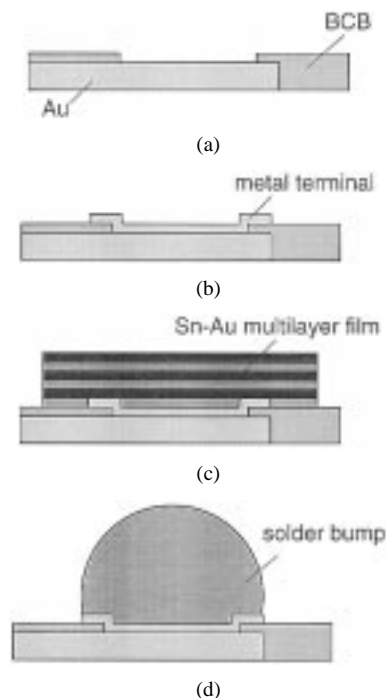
Process for making lead-free solder bumps: (a) via holes are scraped using O_2/CF_4 RIE on the edge of waveguides; (b) wettable metal terminals composed of Ti/Pt/Au are placed on via holes; (c) multilayer film of tin and gold is sequentially deposited and lifted off; (d) precursors are heated to 220 °C for 2 min with a resin flux coating.
